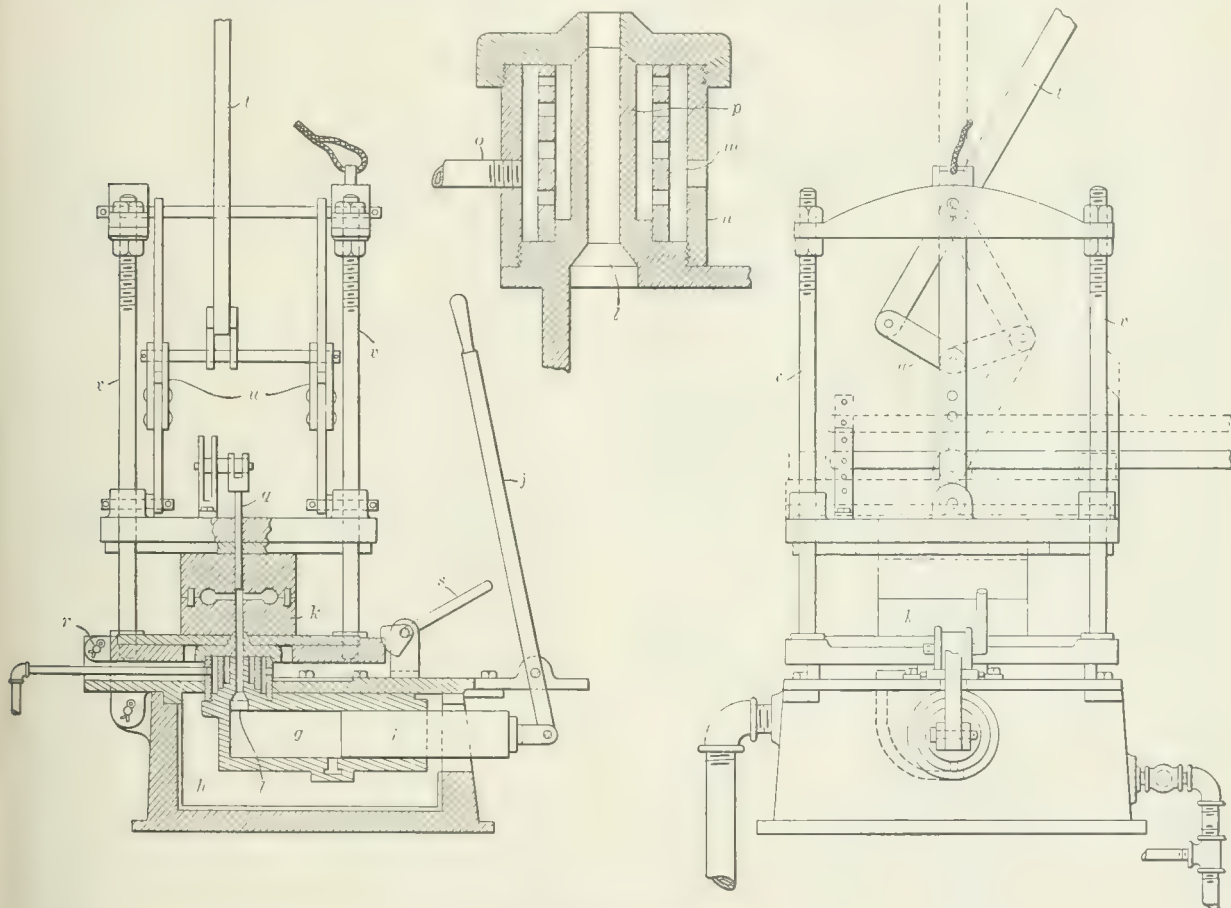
An Upright Hand-Operated Plunger Machine.
